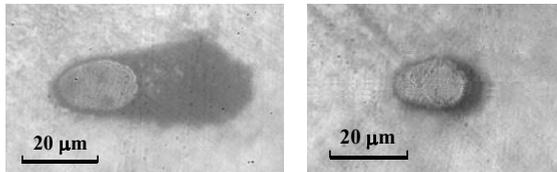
Examples of oval-shaped through microholes machined with inclined electrode
